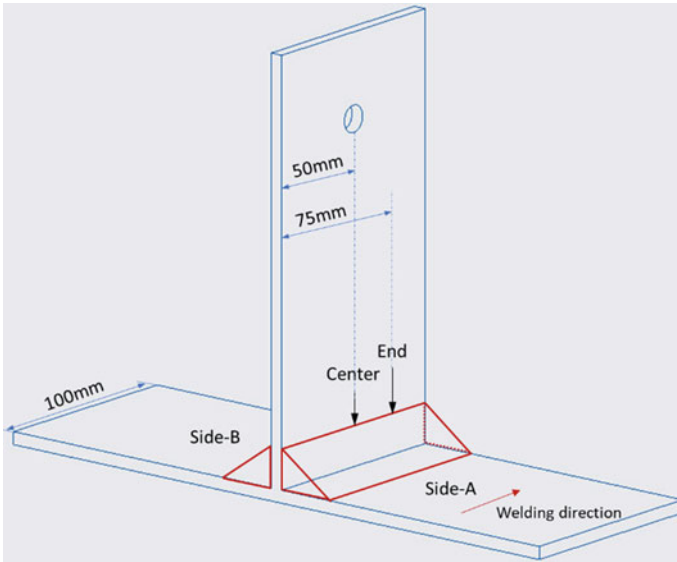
High-strength steel T-joint welded samples showing the location of 'Center' and 'End' sections taken for metallurgical evaluations on both sides (side-A and side-B)
